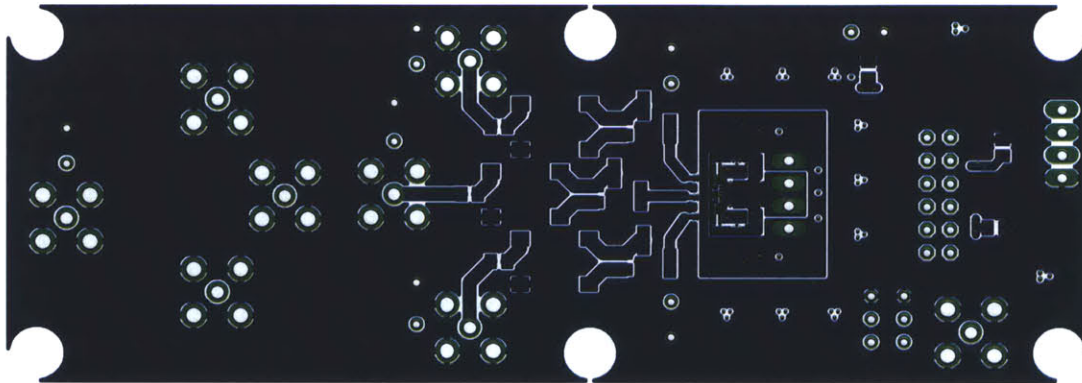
The Layer 4 PCB Layout of the Ac Power Delivery 3 Individual Full-bridge IC PCB Prototype.
